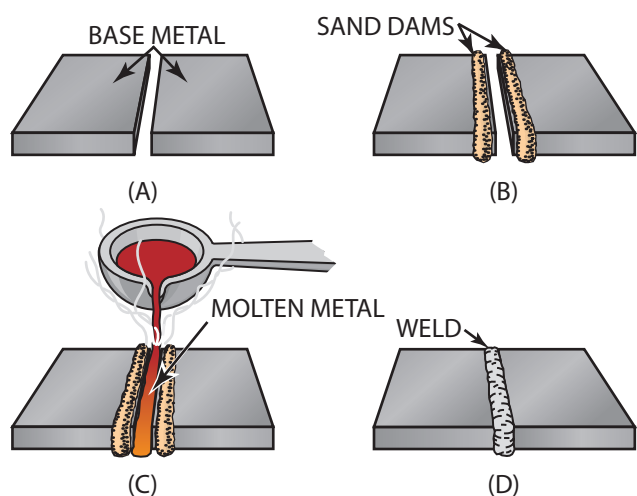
Flow welding: (A) two pieces of metal plate, (B) sand dams to hold molten metal in place, (C) molten metal poured between metal plates, and (D) finished welded plate.
